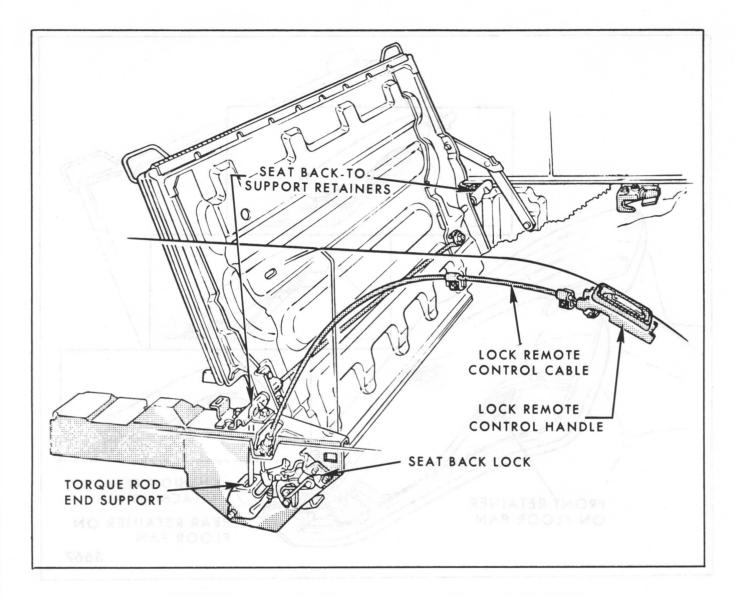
Folding Third Seat Back Installation - "B" Body Three-Seat Station Wagons
